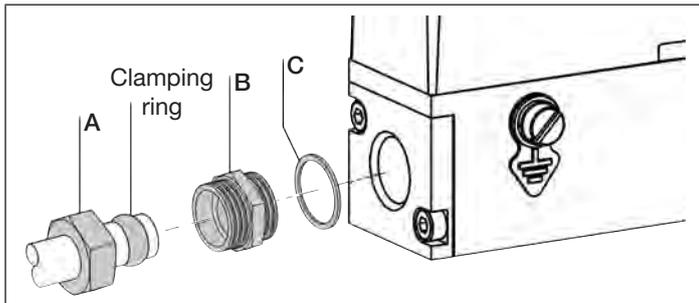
Slide the union nut and clamping ring onto the pipe.
